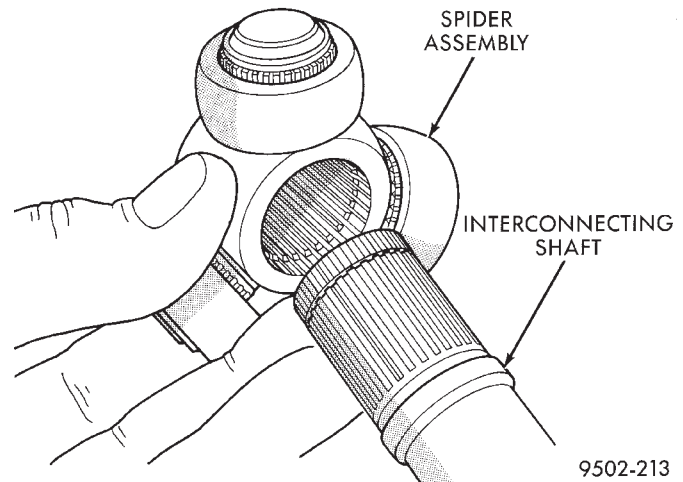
Spider Assembly Installation on Interconnecting Shaft
